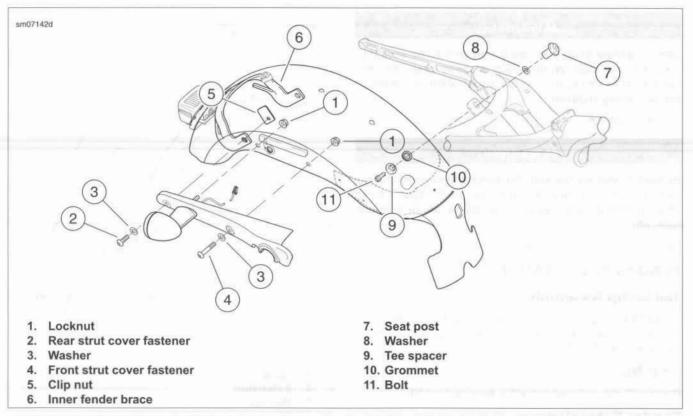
Rear Fender Assembly: XL 883R/L, CAN XL 883N, XL 1200V/X
